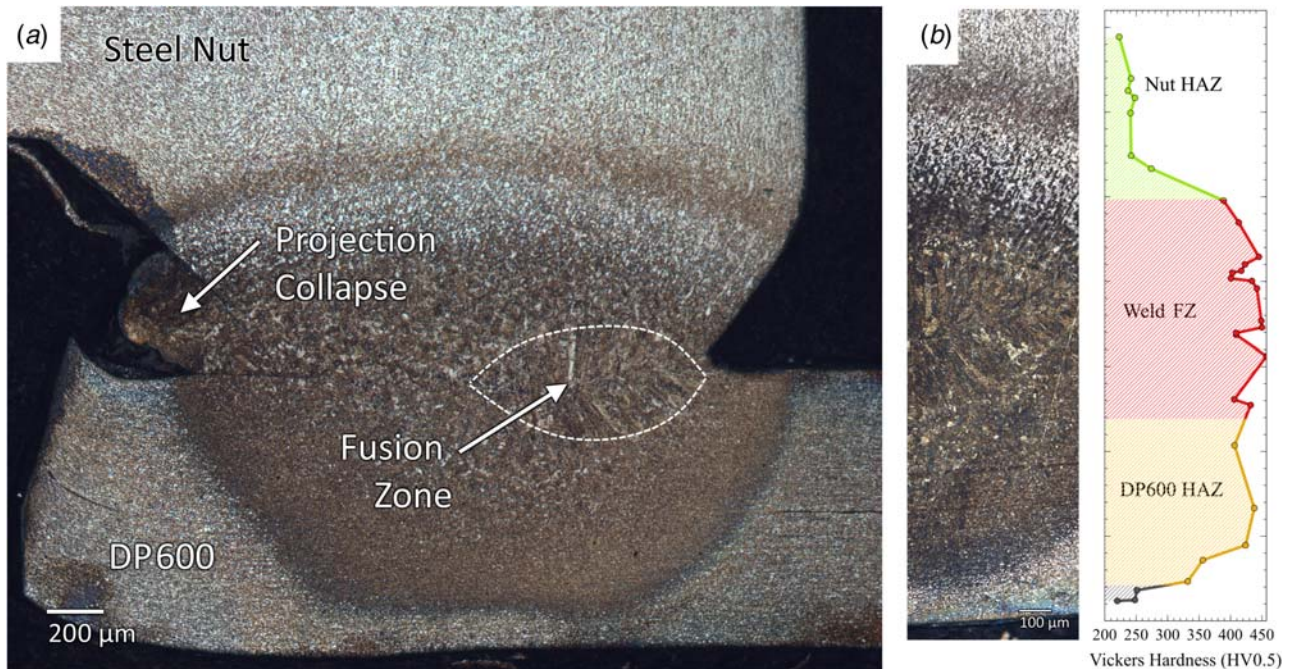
Example of a projection weld between a steel nut and a DP600 sheet made with a class III Cu electrode: (a) showing material extrusion due to projection collapse and weld nugget formation in the FZ and (b) the hardness profile along the cross section
